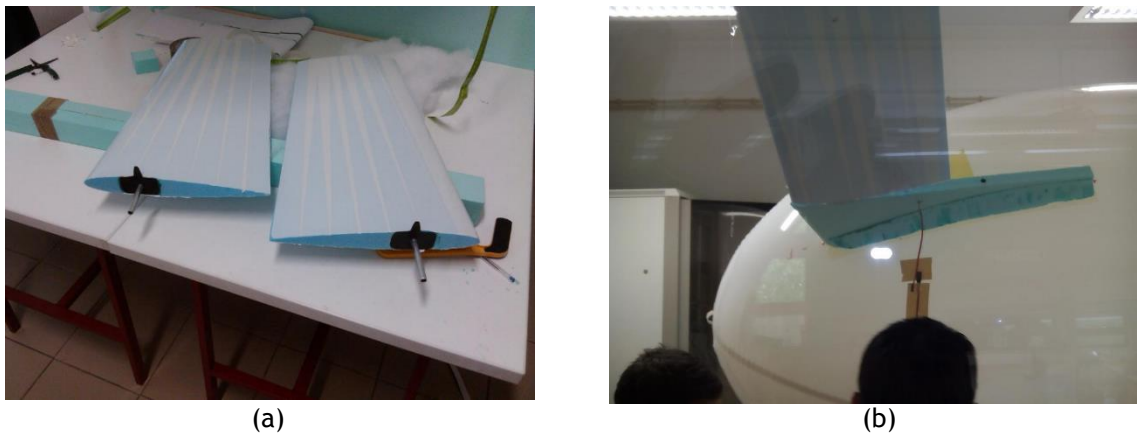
Extruded polystyrene wings. (a) Wings after manufacture; (b) Assembled wing.
